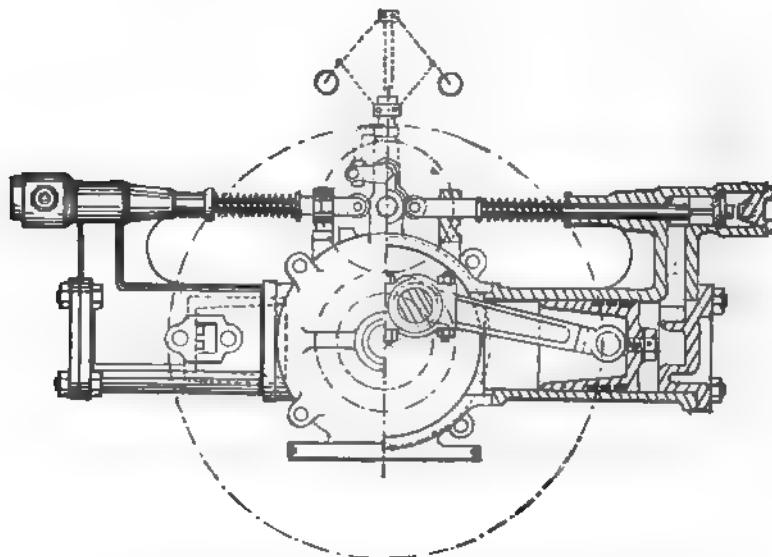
One Model of Serpollet Single-acting Two-cylinder Engine. As may be seen, this engine, with cam-actuated poppet valves, centrifugal governor for regulating the cam movement, and large fly wheel, closely resembles gas engines of the double-opposed cylinder type.
